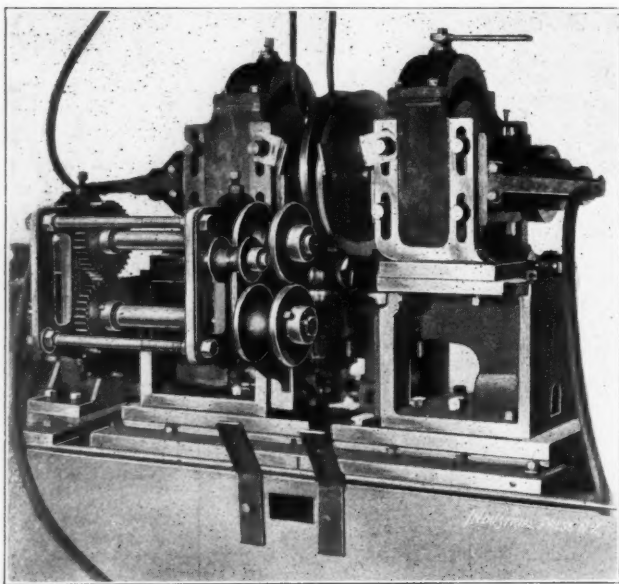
Machine for Welding the Longitudinal Seam in Tubing.
